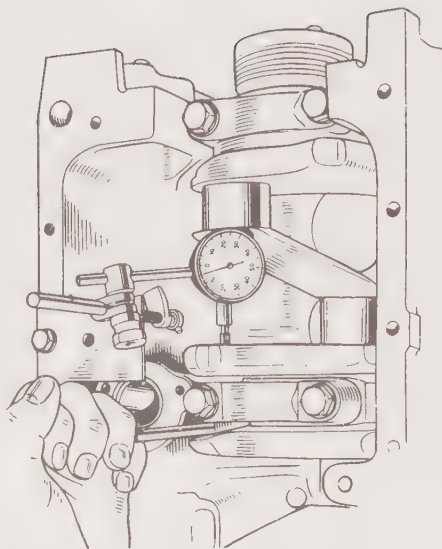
33 Checking crankshaft end-float by levering with screwdriver.
